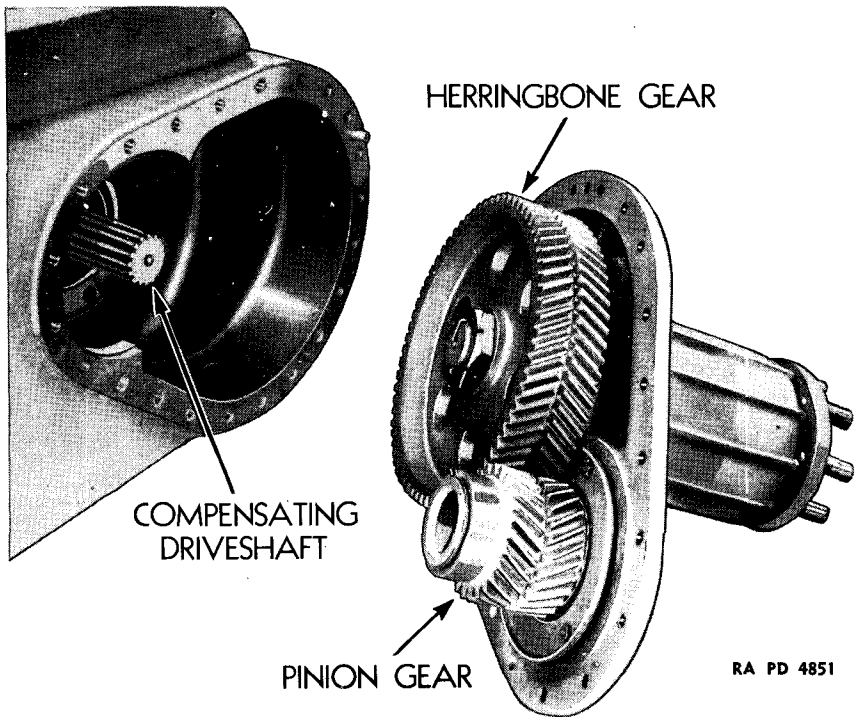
DIFFERENTIAL AND FINAL DRIVE ASSEMBLY
